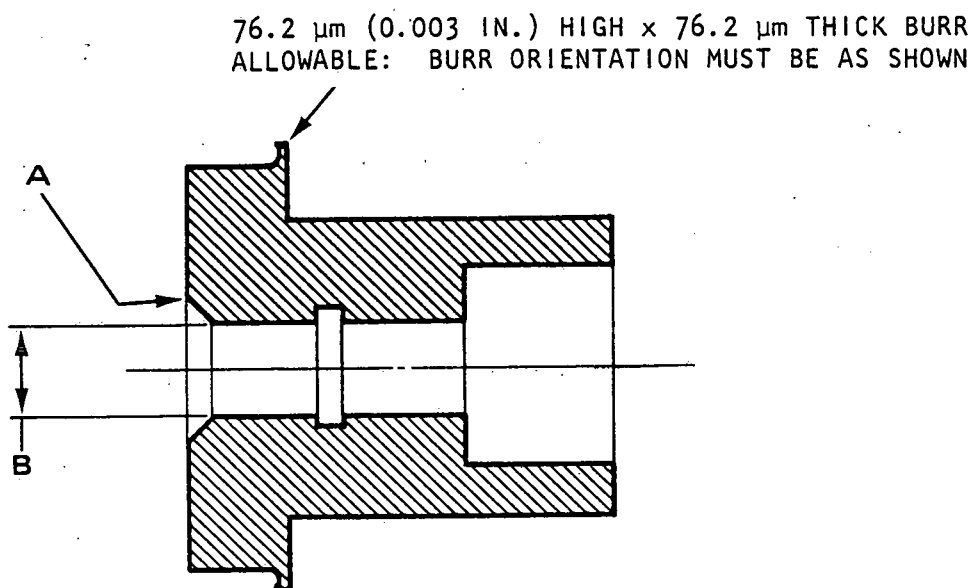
Define Allowable Burr Size and Location on Simple Parts
